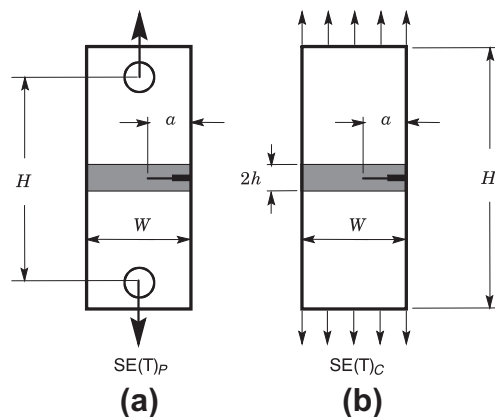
Geometries for analyzed center notch welded SE(T) fracture specimens with square grooved welds: (a) pin-loaded specimens; (b) clamped specimens.
